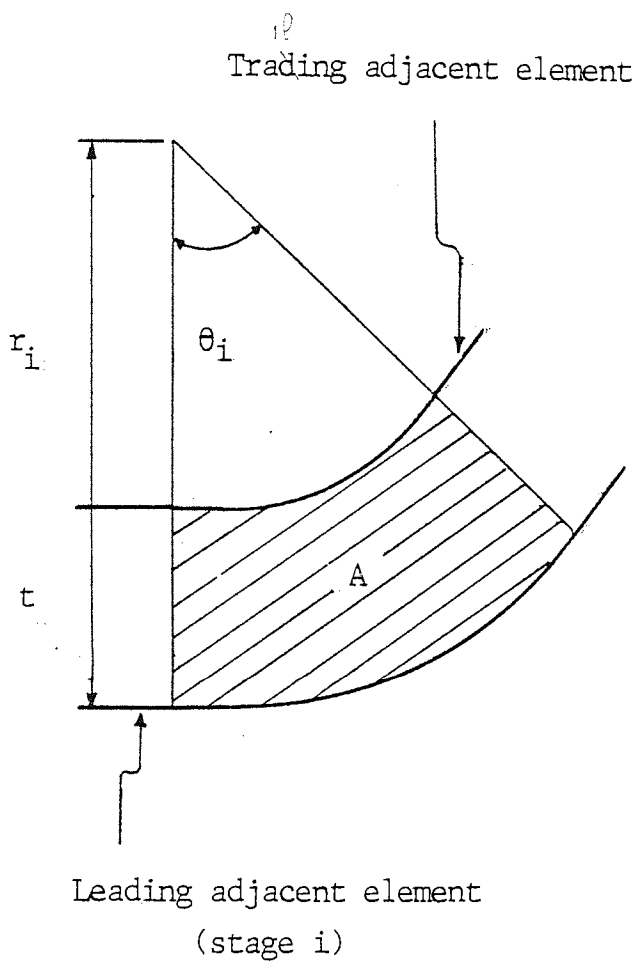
THE OPENING-RADII METHOD OF FORMING
